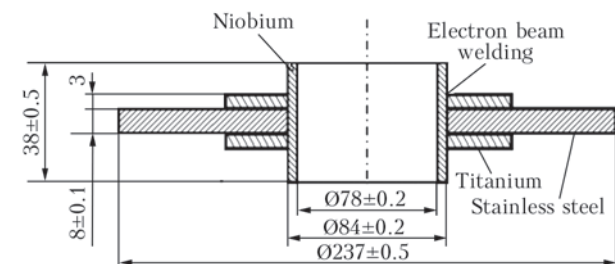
Scheme of manufacture of transition piece, using the explosion welding of niobium with stainless steel
